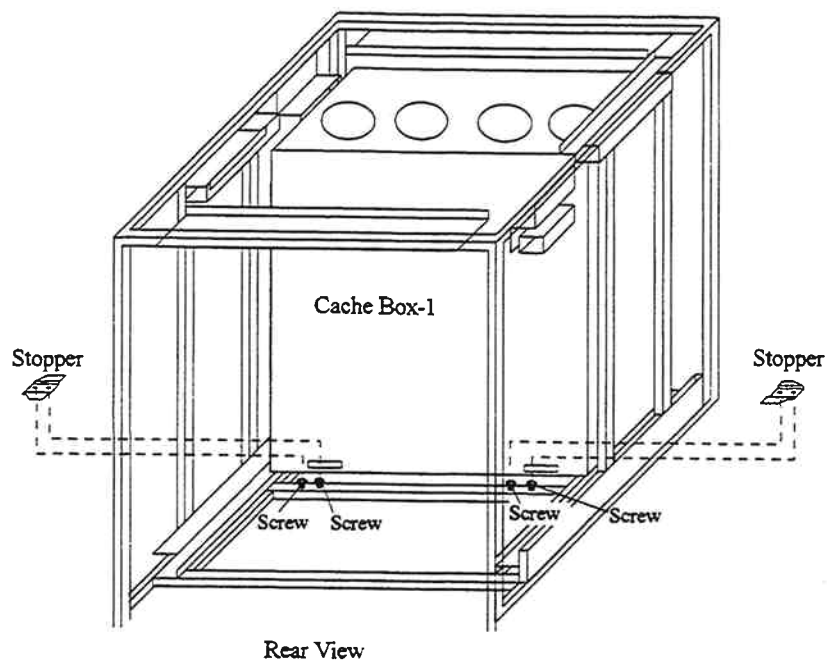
Attachment of the Stopper
